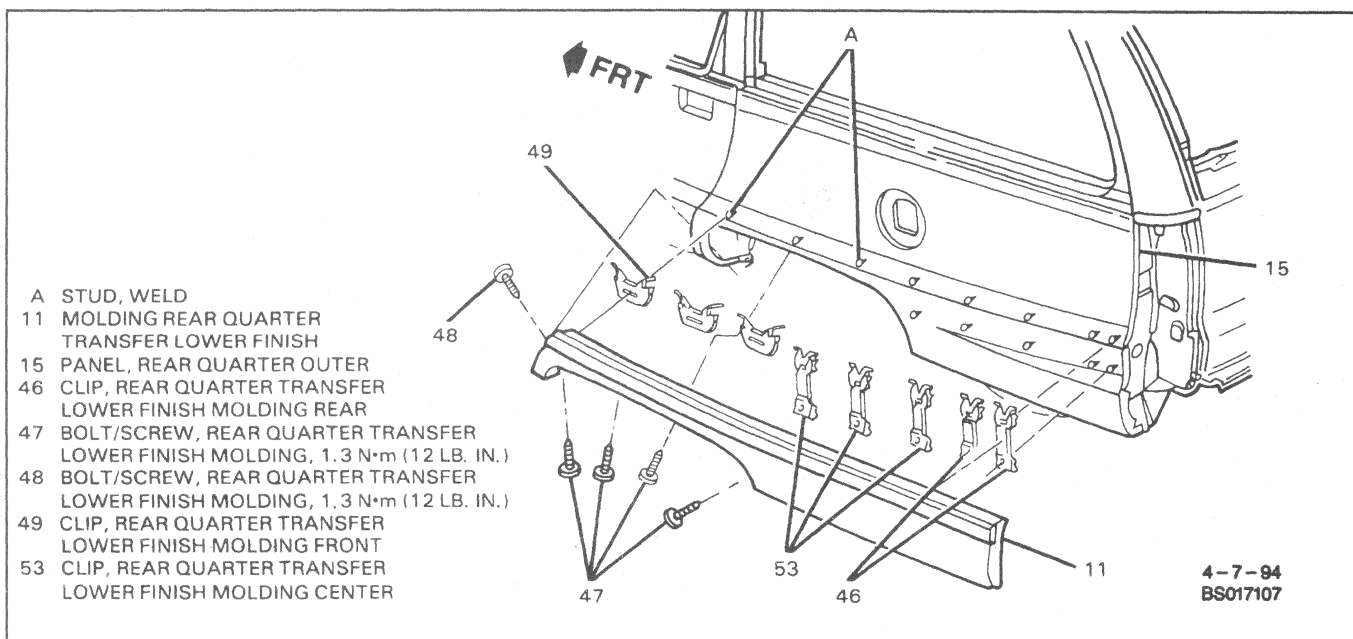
Rear Quarter Transfer Lower Finish Molding - (Wagon)
